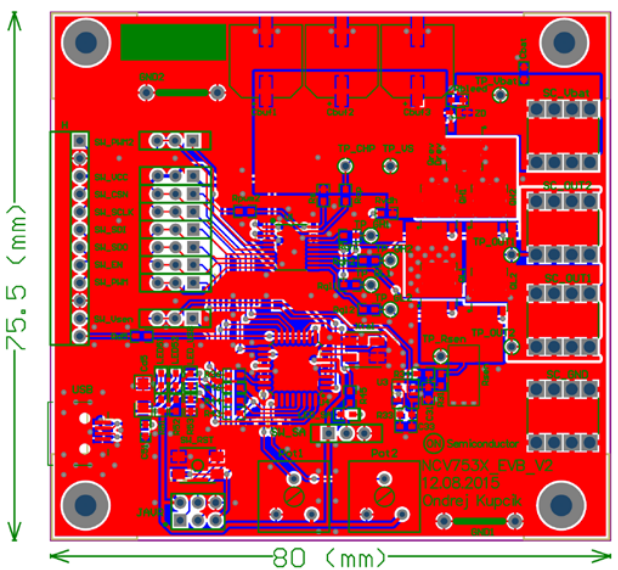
NCV7535 EVB PCB Top Composite Drawing
